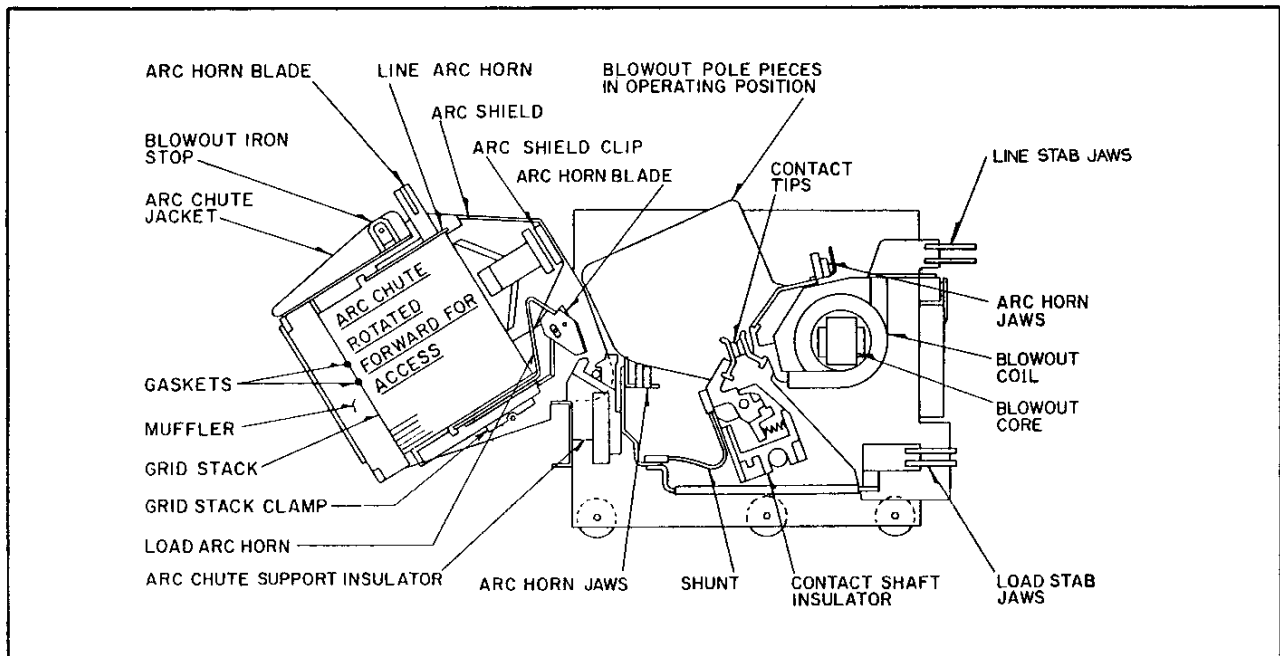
Sectional View Through Contacts (Dwg. 5250C05)
